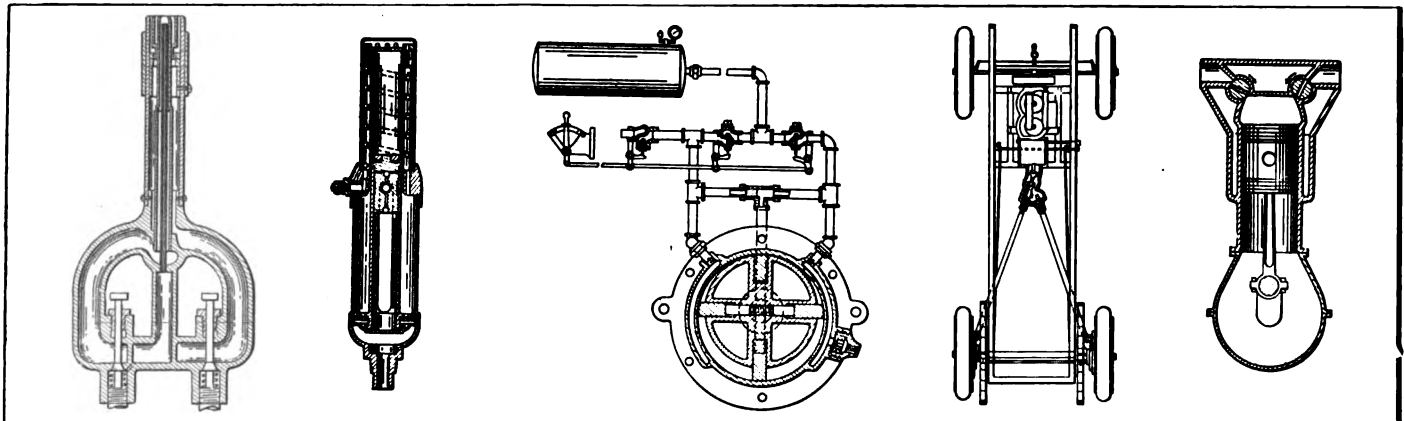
Weintz blow-torch. Fig. 2—Costello-Skinner air compressor. Fig. 3—Clarke cranking device. Fig. 4—Miggett drive. Fig. 5—Huff engine
